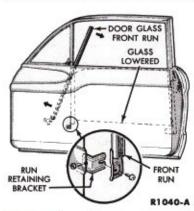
Door Glass Run Removal —Body Types Except 63, 76
